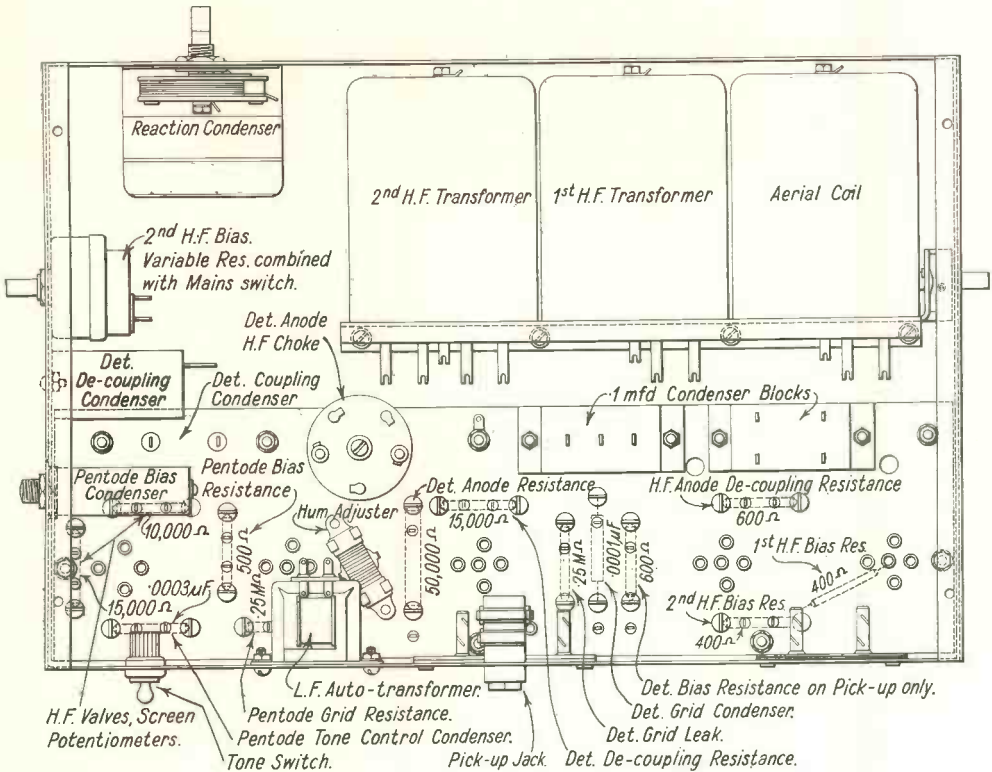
UNDERSIDE OF CHASSIS SHOWING POSITION OF COMPONENTS.
